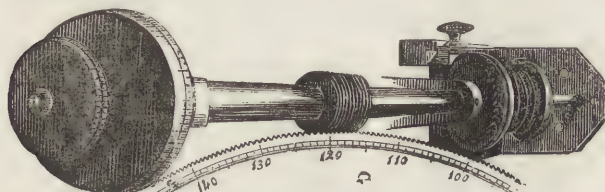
PART OF ENGINE PLATE, WITH THE MILLED HEAD AND DIVIDED MICROMETER.
